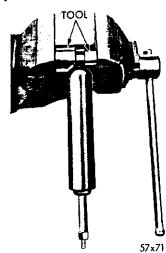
Removing or Installing the Shock Absorber Lower Bushing
